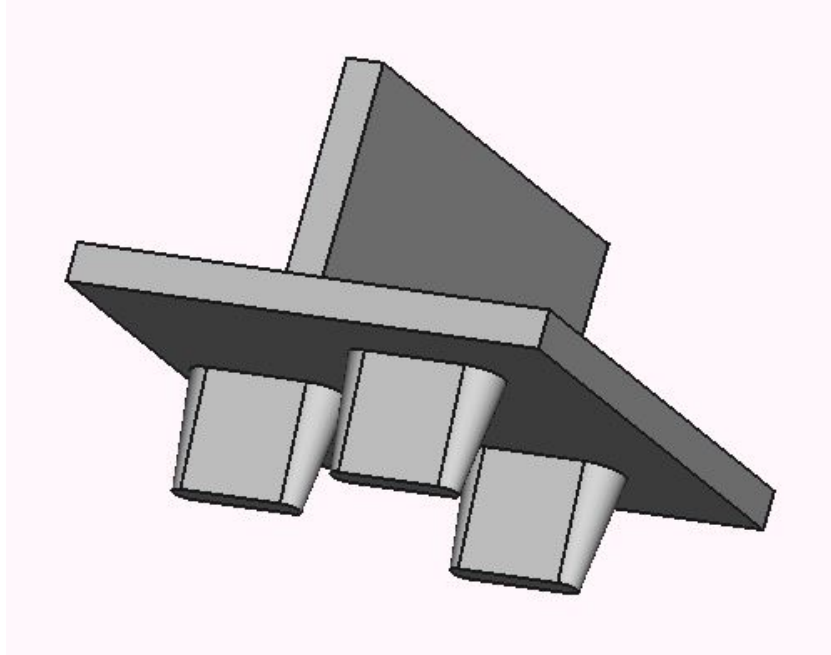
FreeCAD Drawing of Bladed Studs and Bracket
